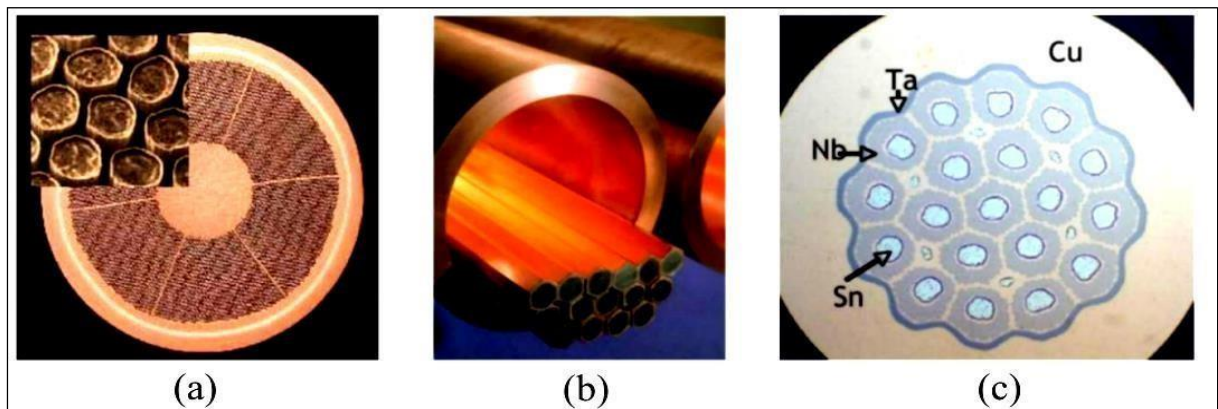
(a) NbTi wire finalized, (b) bar assembly before wire drawing, (c) Nb₃Sn wire before heat treatment [24-25].
